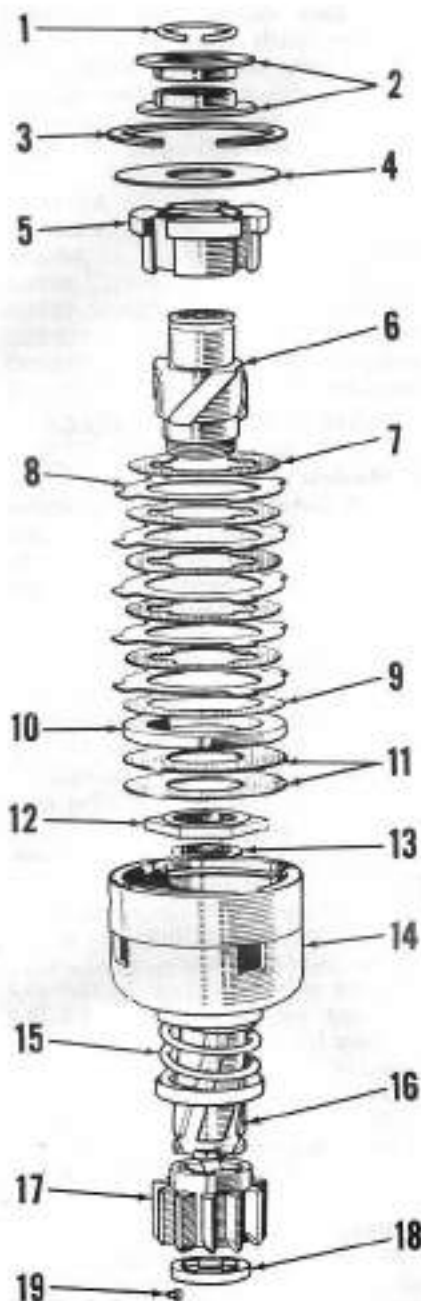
Exploded view of Lucas starting motor drive clutch and gear. Clutch will transmit torque in driving direction only.
